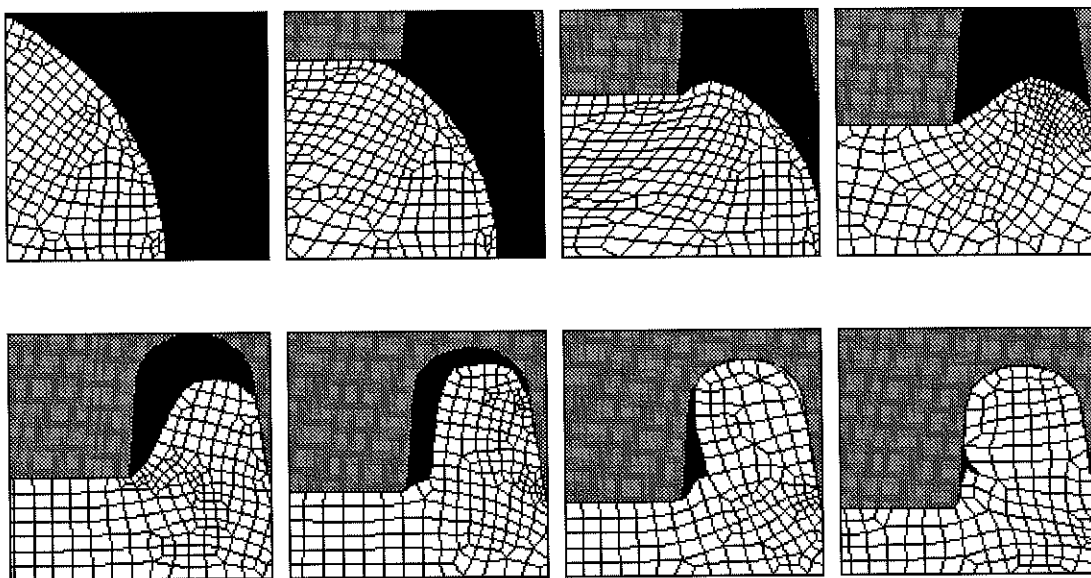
Connecting Rod Forging (Corner radius = 0.0, $m = 0.0$)
